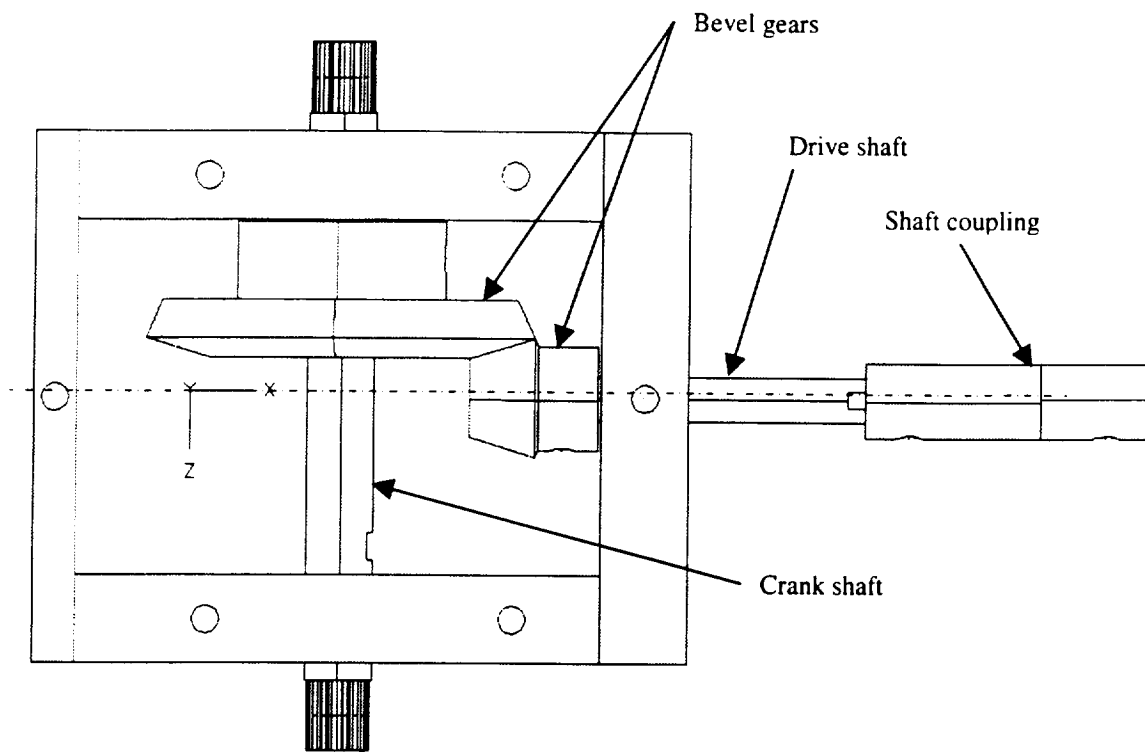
Top view of the gearbox showing bevel gears, shafts, and coupling.
